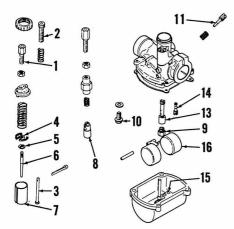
Exploded view of typical Mikuni carburetor.
